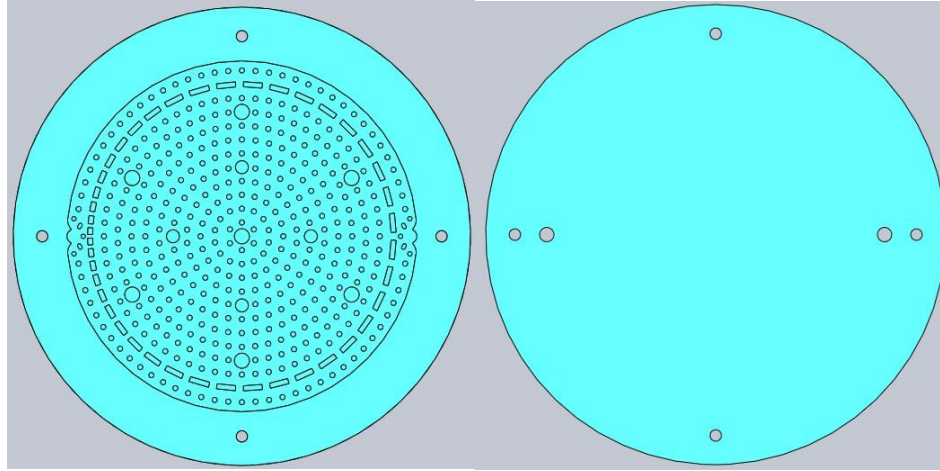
Cooling plate prototype: (left) bottom lamina; and (right) top lamina.
